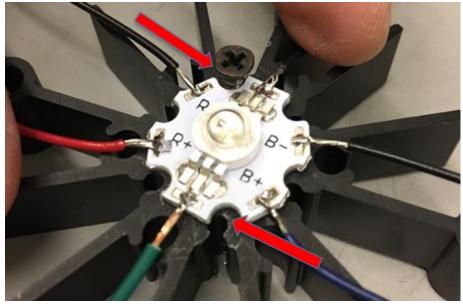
Install #4 counter sink screws using smaller, innermost holes (arrows).
